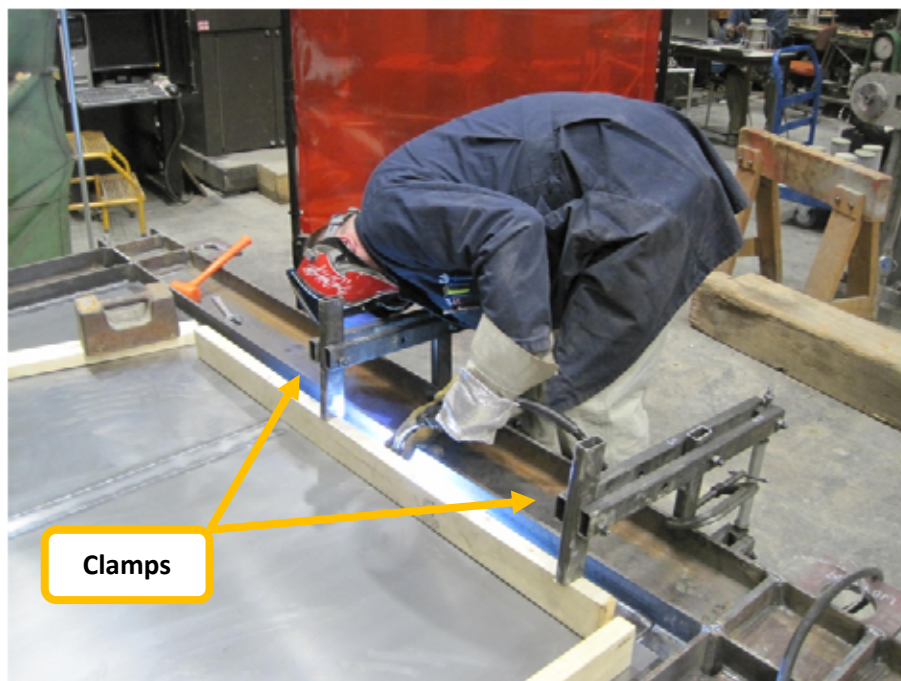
Clamping Force Holds Infill Panel-to-Fish Plate Joint During Tack Welding
